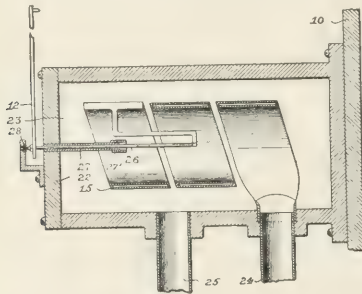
INTERIOR OF HELICAL PRESSURE TUBE
